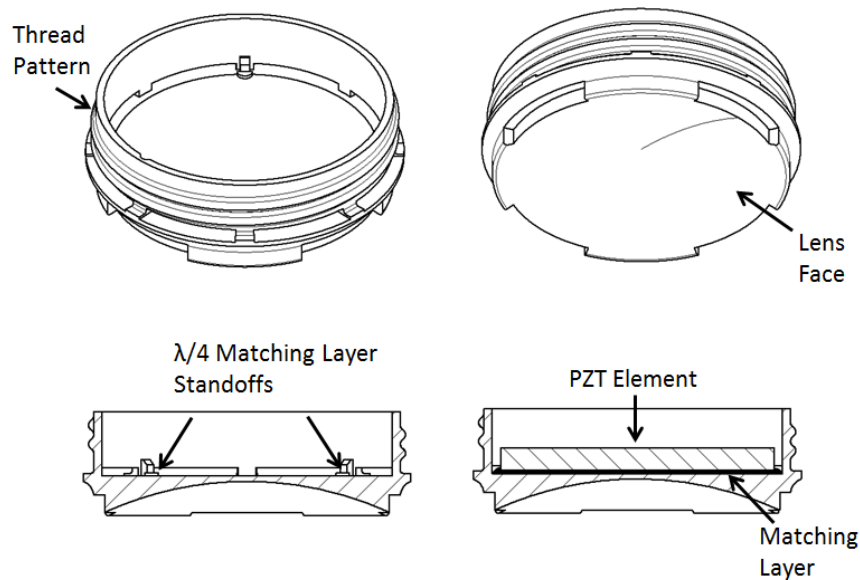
Design drawings of a single element module housing showing the outer threads and the elliptical lens (top row). Cutout views (bottom row) show the matching layer standoffs inside the housing in order to achieve the correct layer thickness when assembling the module. The quarter-wavelength gap between the disc and the back of the elliptical lens is filled with a high acoustic impedance tungsten-epoxy compound specifically formulated for this purpose.
